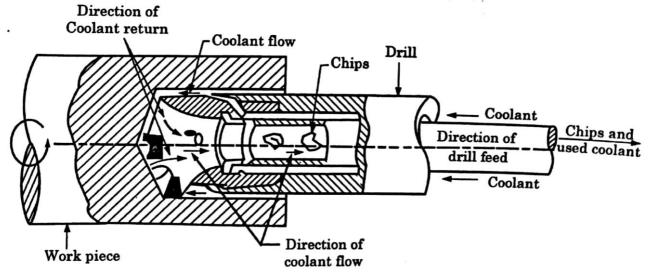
Deep Hole Drilling on a Horizontal Machine
